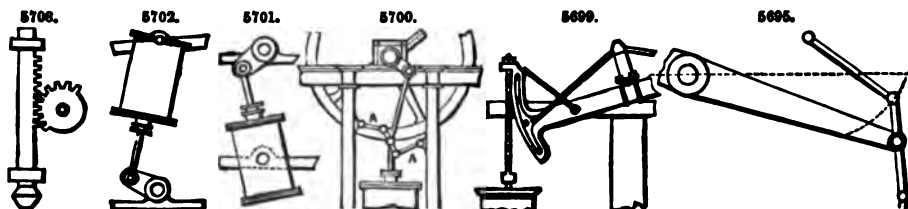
Oscillating engine. The cylinder has trunnions at the middle of its length working in fixed bearings, and the piston-rod is connected directly with the crank, and no guides are used.
